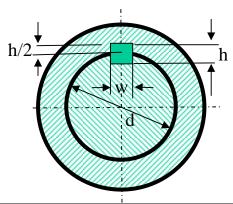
Making a flat keyway by an end-mill cutter.
